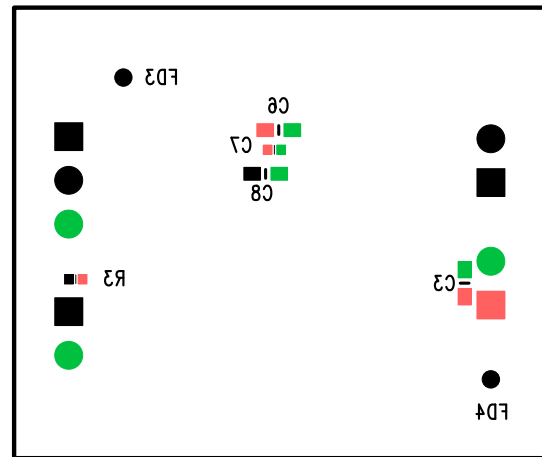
CRD35L01-FHD Bottom Side Component Placement
